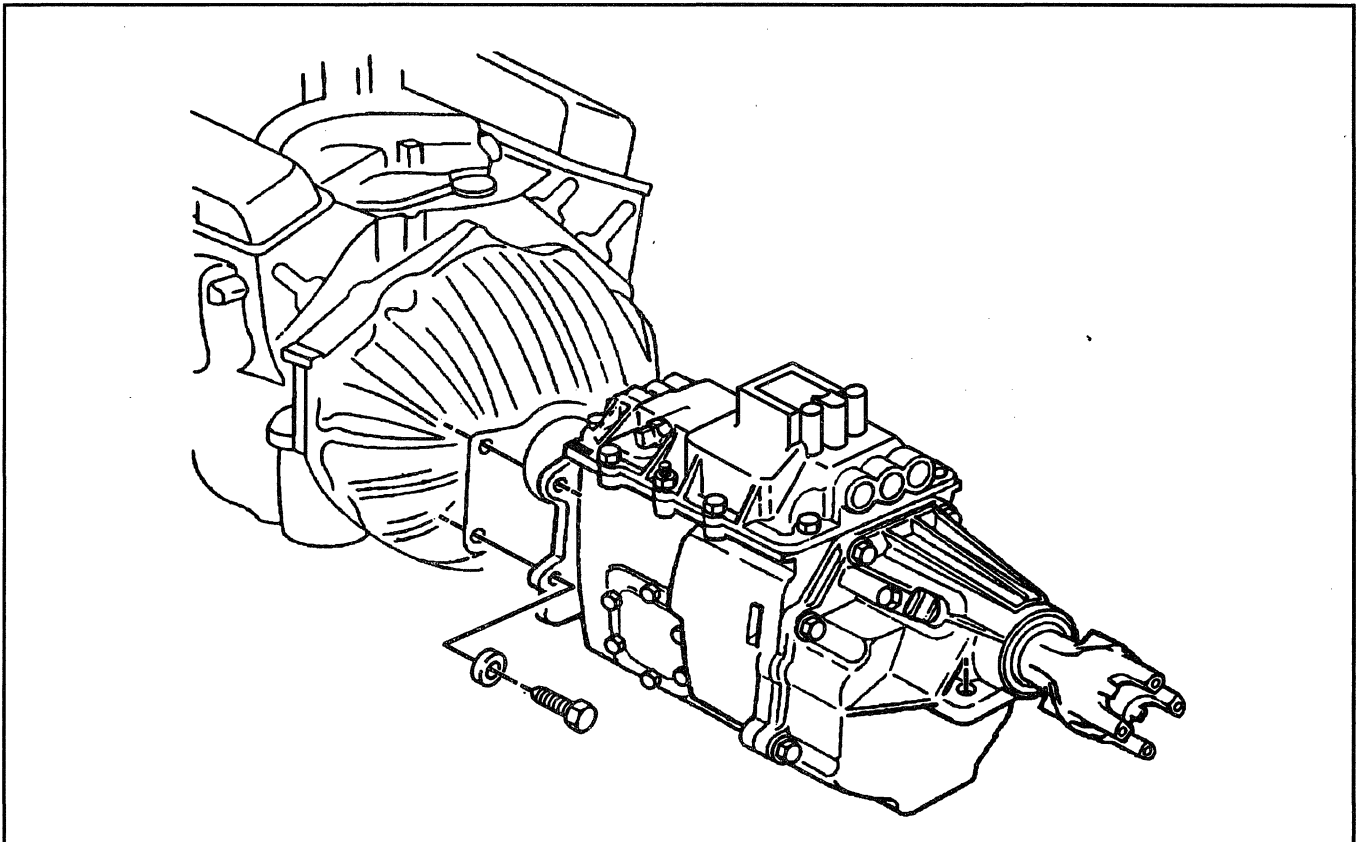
Transmission to Clutch Housing (New Venture Gear 4500) - 2WD Models
